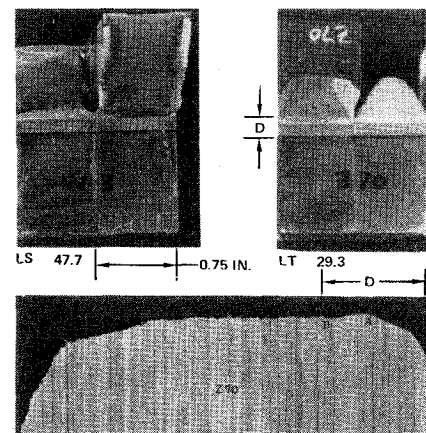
Fracture surfaces of 7050-T76511 extrusion codes W and Z specimens illustrating  $45^\circ$  and  $90^\circ$  fracture paths (upper photographs) and section through specimen Z70 at  $5\times$  showing fracture edge and grain flow (lower photograph). The notch root is at A, the fatigue precrack front is at B, and the remainder is the fast fracture surface. Test specimen orientations and  $K_{Ic}$  values are indicated.
